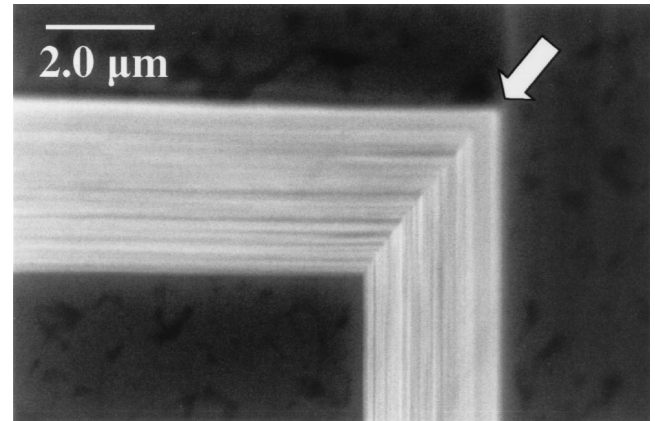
Sharp cutting edge of a four-side, tungsten carbide micro-end mill tool. Edge shown is the intersection of two focused ion beam sputtered facets.
